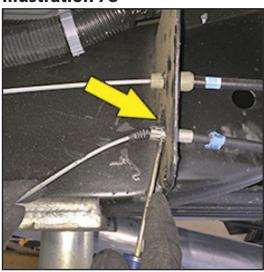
& 78] Disconnect the driver side emergency brake cable from brake adjuster at the frame. Collapse the prongs retaining the emergency brake cable in frame bracket and remove. Route the cable over the axle tube, then re-attach it to the frame mount and the adjuster. {vise grips, screwdriver
